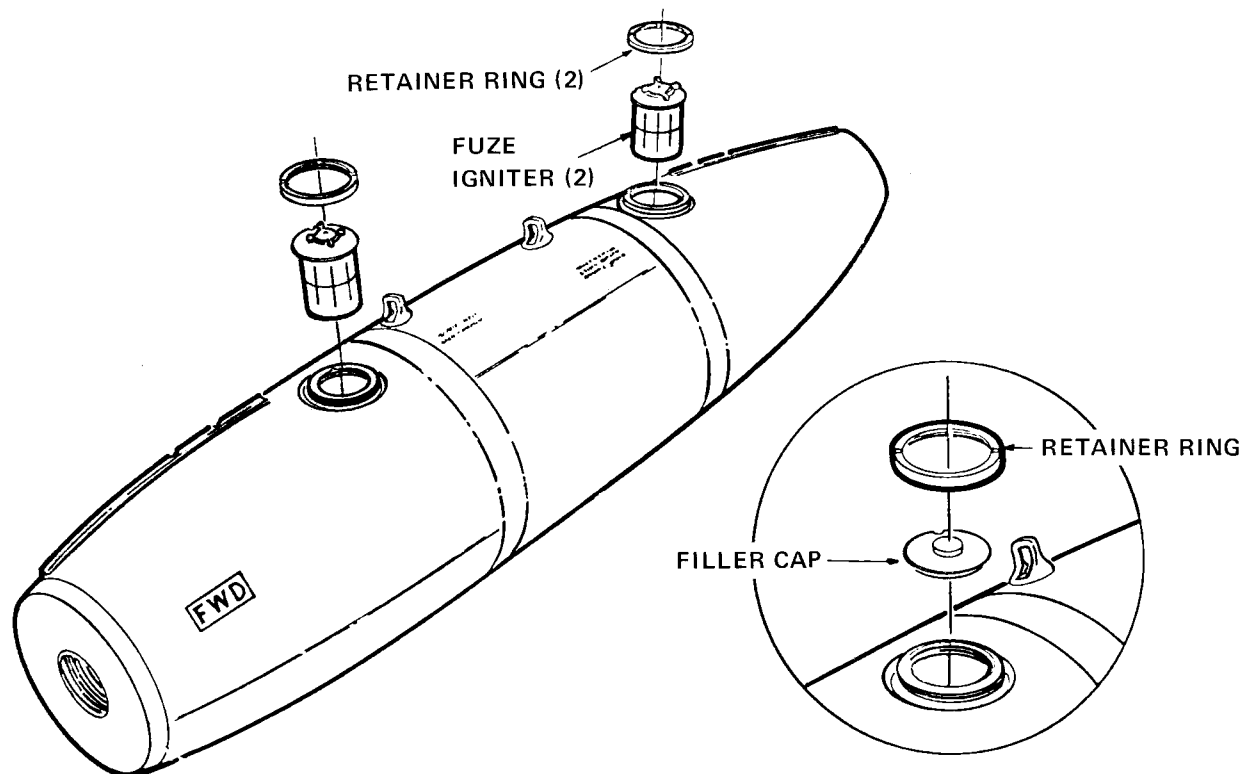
500-Pound Fire Bomb MK 77 Mod 4 — Exploded View
